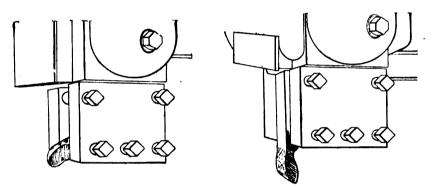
TOOL FOR ROUGHING CUT ON OUTSIDE DIAMETERS
